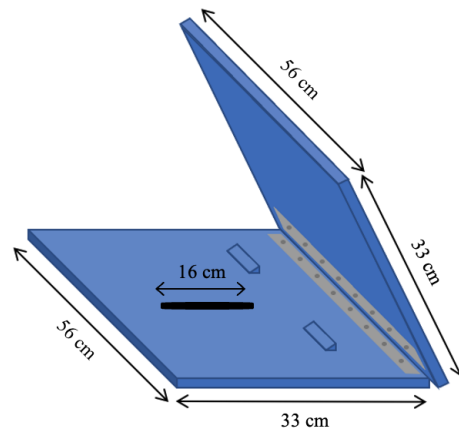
Left-side door. This is a movable door to be inserted at the left side of the empty space of the cradle shown in Figure 8. The large slide hole in the middle of its lower panel allows the door to stay in different positions by using a wing nut (which can be seen in Figure 3 and, more clearly, in Figure 4).
